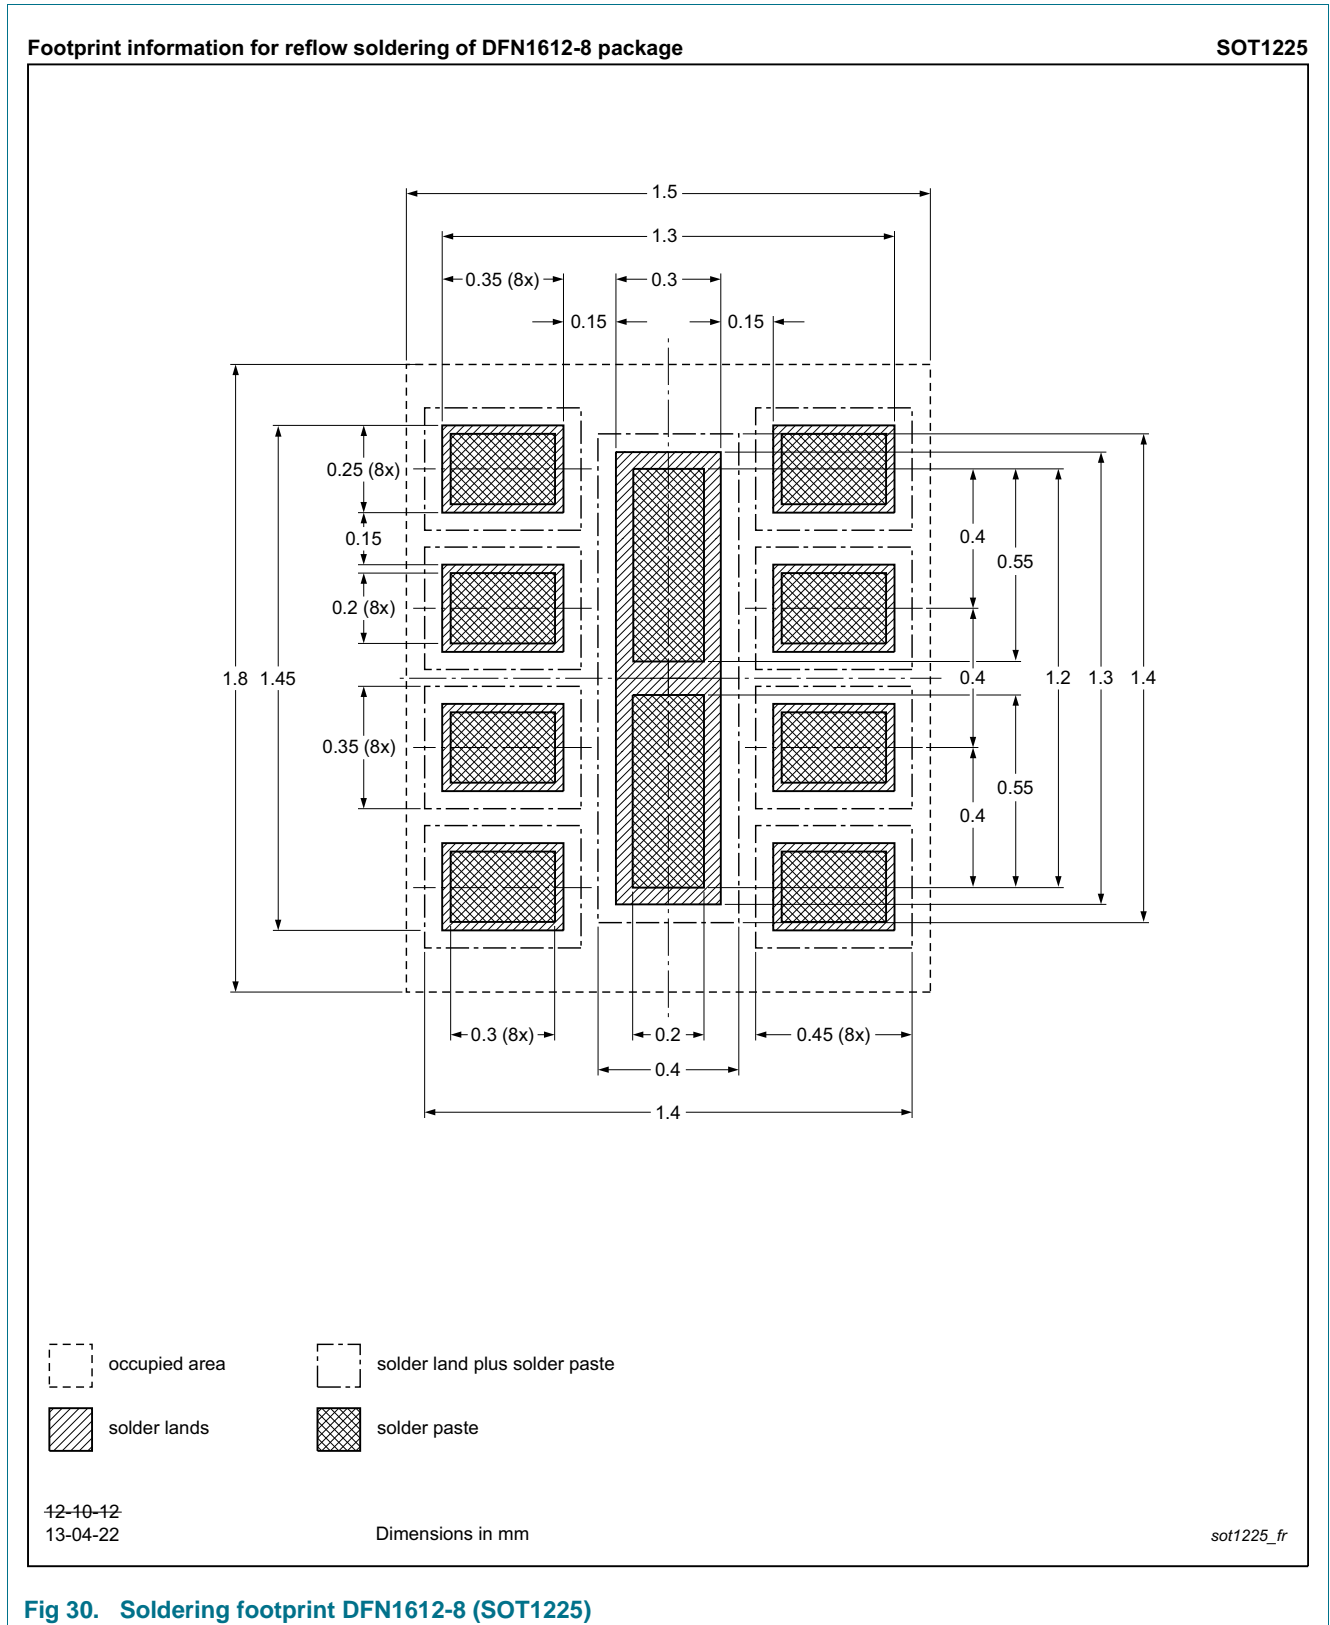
Soldering footprint DFN1612-8 (SOT1225)
